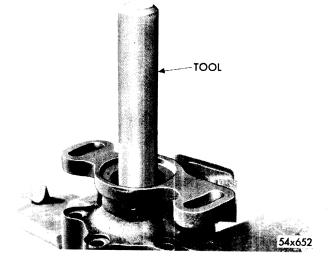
Installing Shaft Bushing in Body (Tool C-3233)
